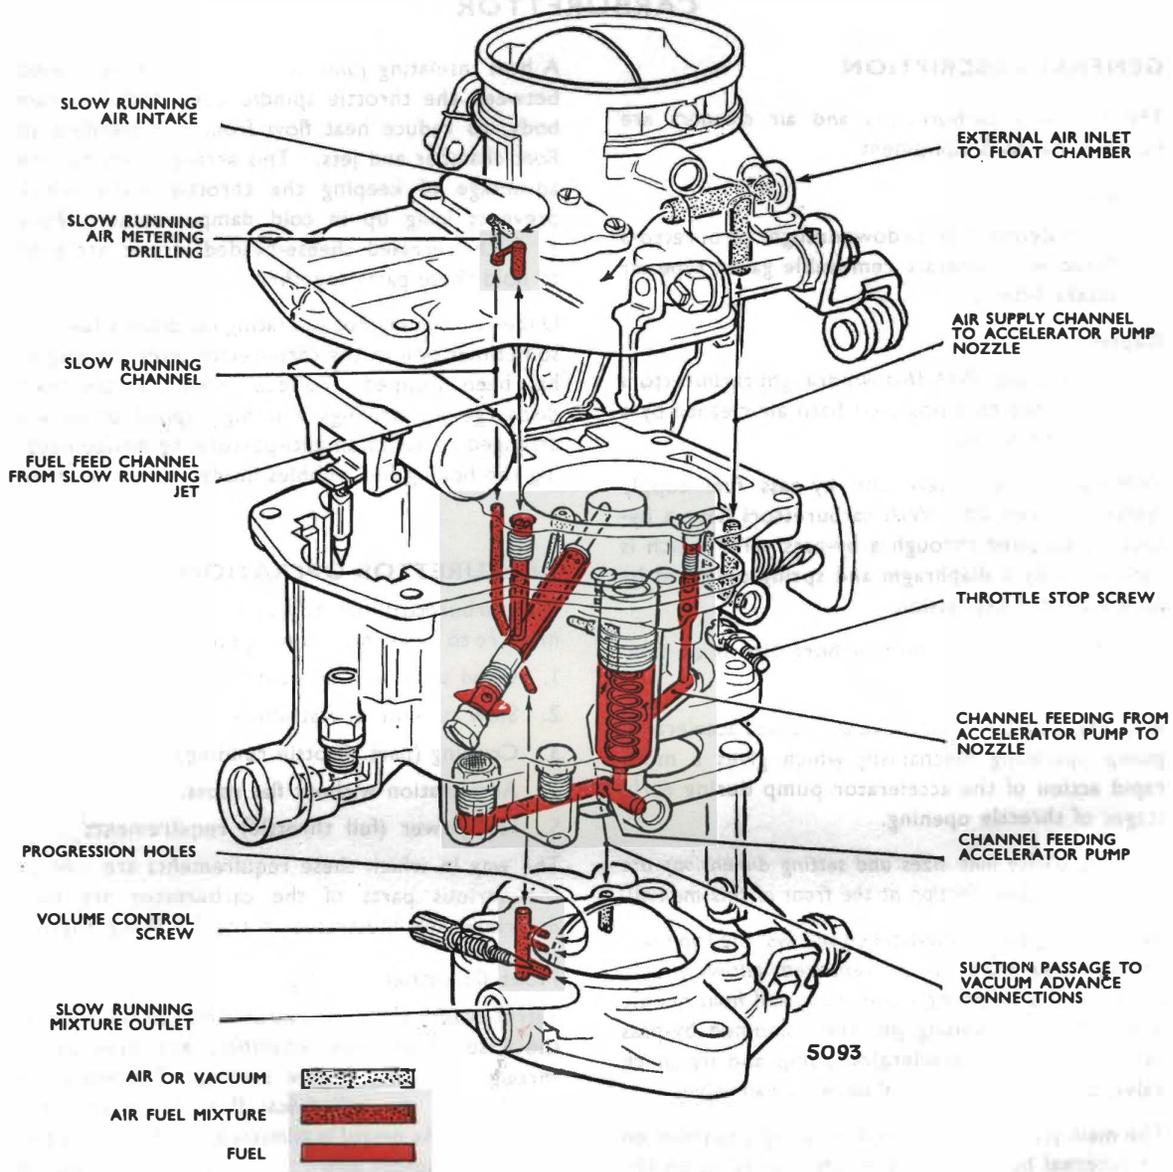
Zenith WIP 36 carburettor. Arrangement of channels
